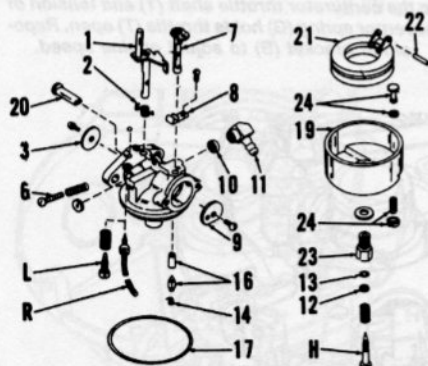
Exploded view of typical Tecumseh float type carburetor used on some models.
